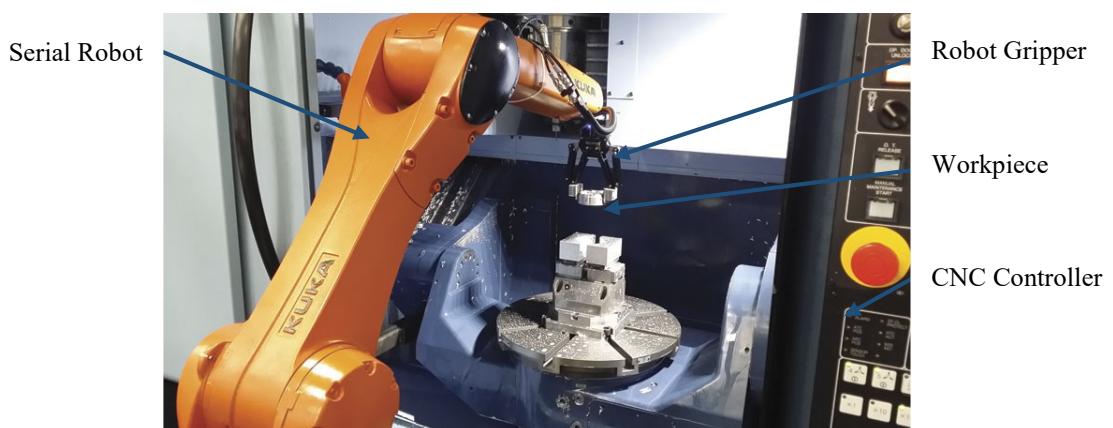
CNC Machine with KUKA Tending Robot [5]
